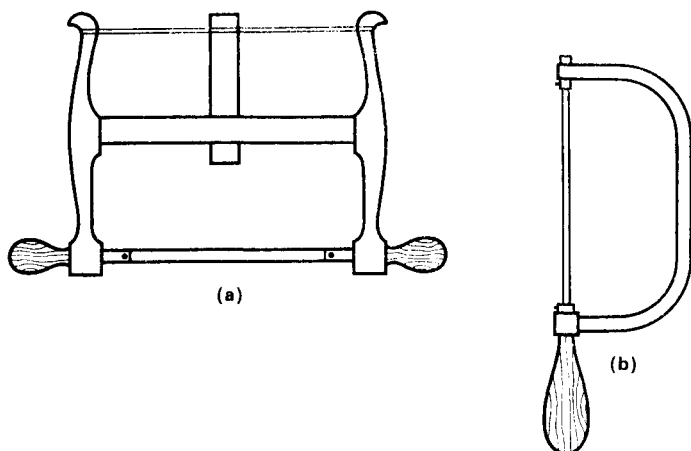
(a) The bow saw which is used for cutting curved shapes. (b) The metal framed coping saw cuts curves and is useful for removing the waste when cutting dovetails.
